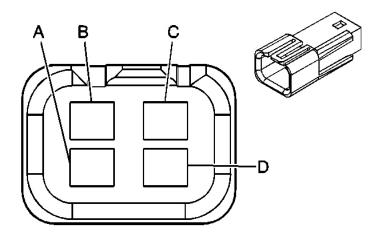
Outside Rearview Mirror - Passenger C2 (DD0) Connector End View
